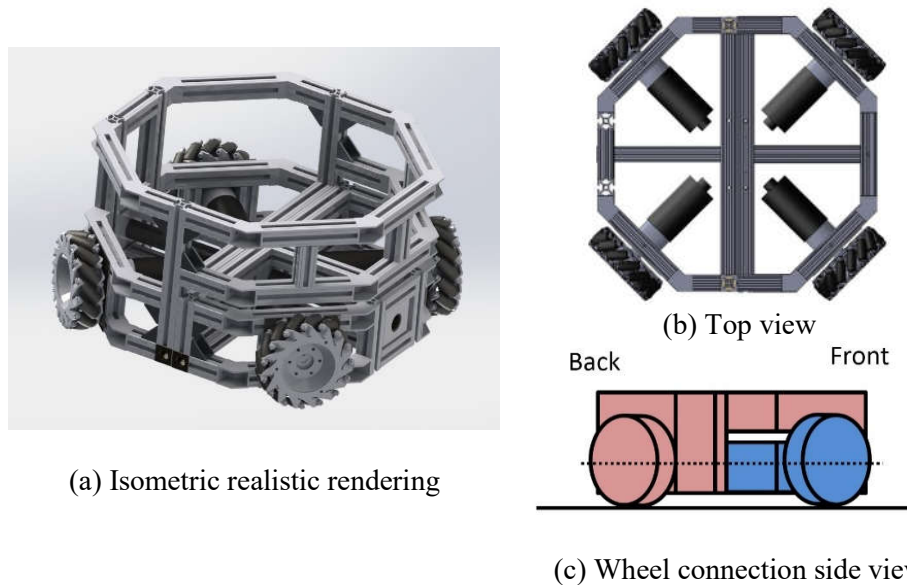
Third and final design. Pre-rendered view (a) along with the top view (b) and side view (c) showing the two parts of the suspension in pink and blue.
